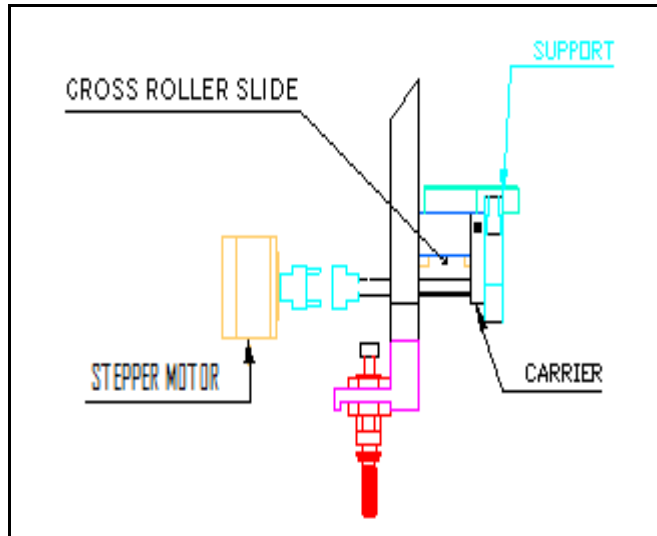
Side View of the Programmable Narrow Track Tool
